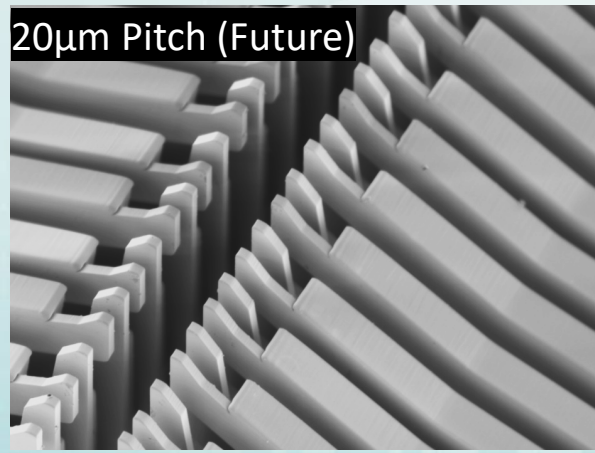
Probe Assembly; 20  $\mu\text{m}$  Pitch
